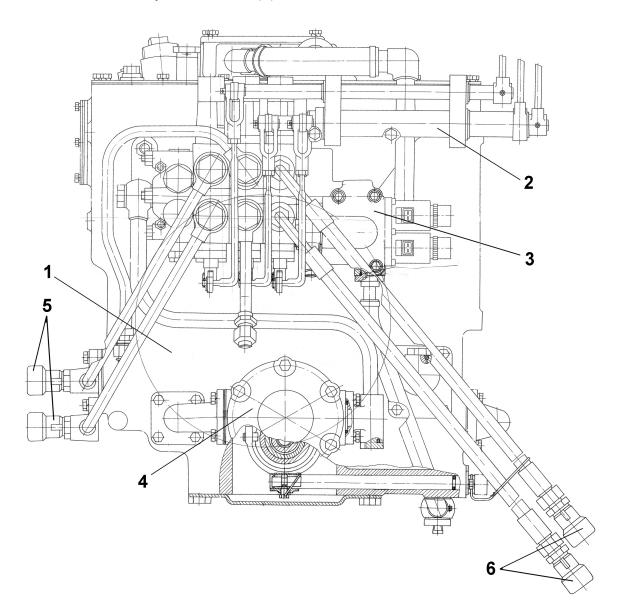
Casing of the hydraulic units assembled with the other ones 1 – oil tank; 2 – distributor control; 3 – electro-hydraulic unit (RS 213 "Mita" + adaptor + EHR5); 4 – HШ32-3 pump; 5, 6 – side leads.
